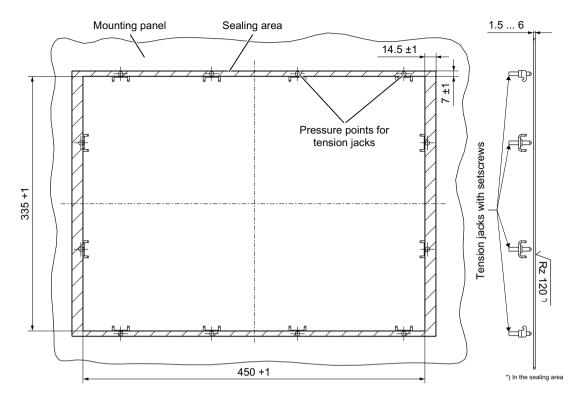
Dimension sheet for installing the TP 015AT operator panel front
